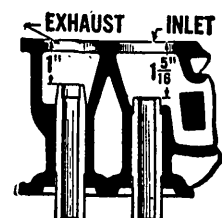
Position of valve guides in 1951-52 six-cylinder engine
